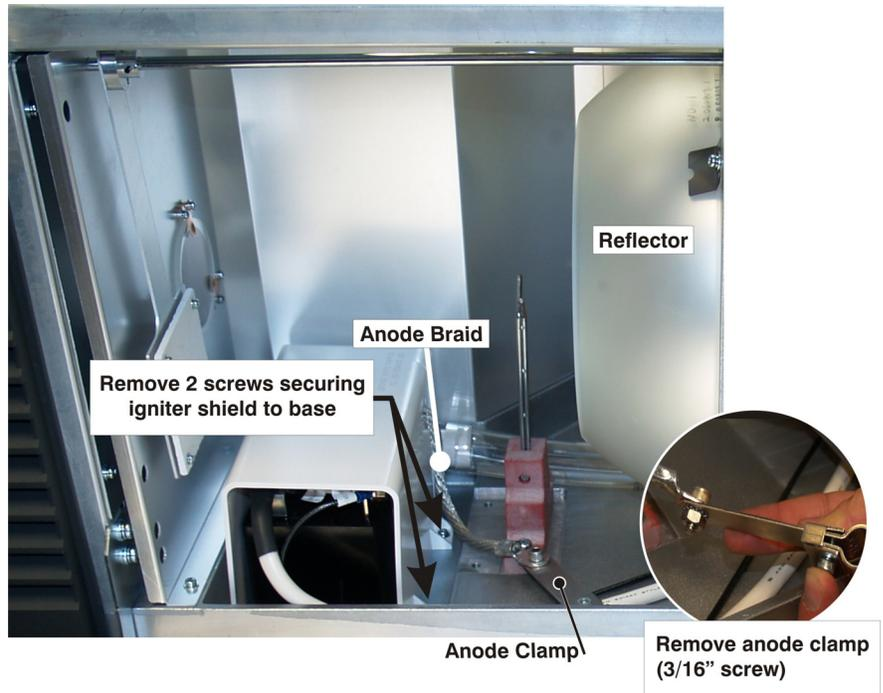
REMOVE IGNITER SHIELD AND DISCONNECT ANODE CLAMP
